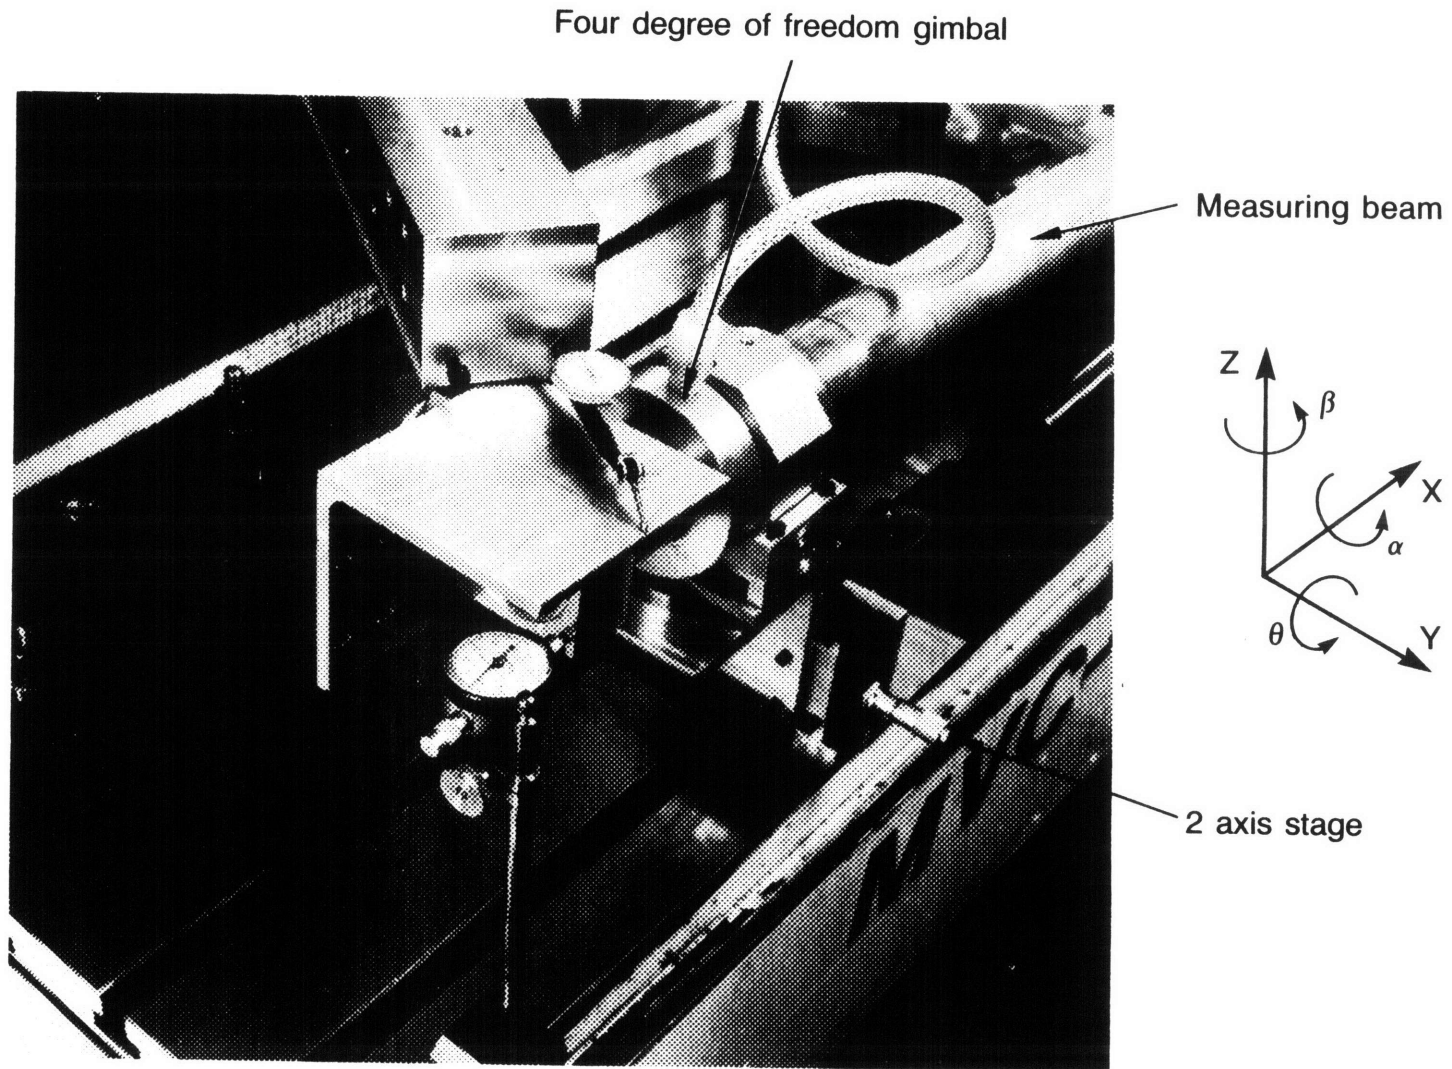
Dial indicators on machine tool spindle mount used to measure coordinates of measuring beam
